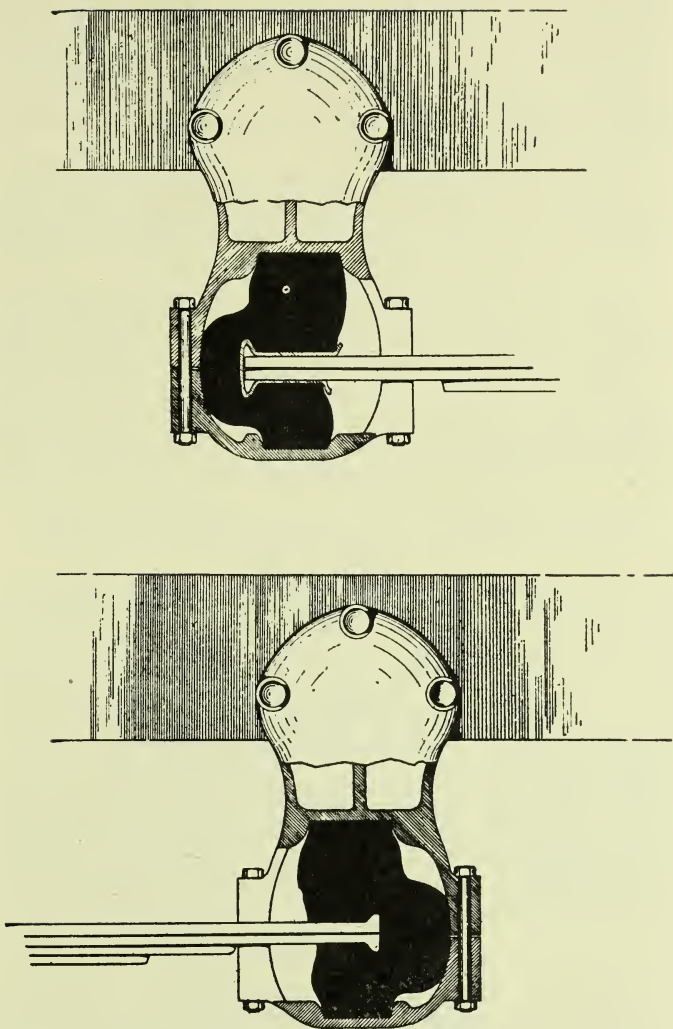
RUBBER SPRING-SHACKLES USED ON THE TYPE-J SPRING
